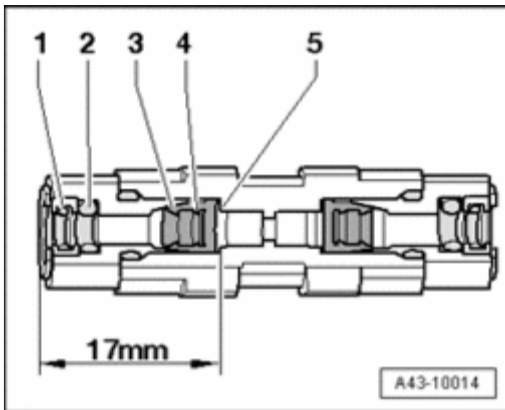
Identifying Sealing Rings, Edges, And Cutting Ring
